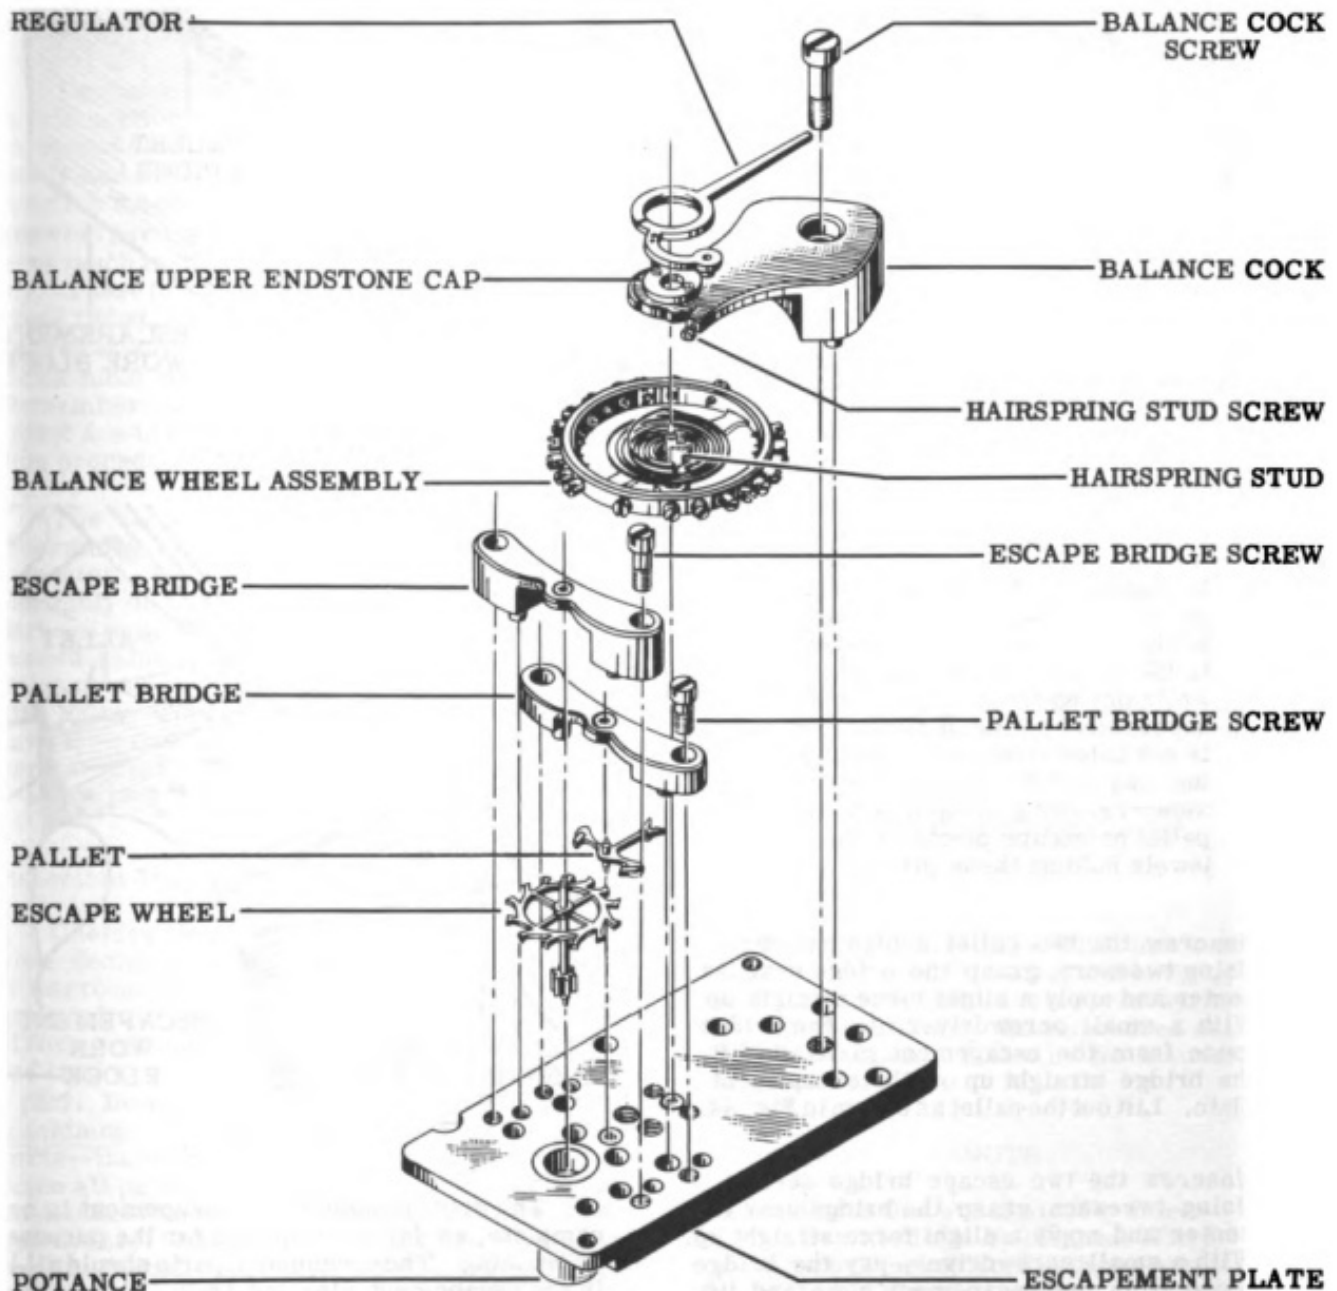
17E Boat and Deck Clock Escapement Assembly, No. 22
